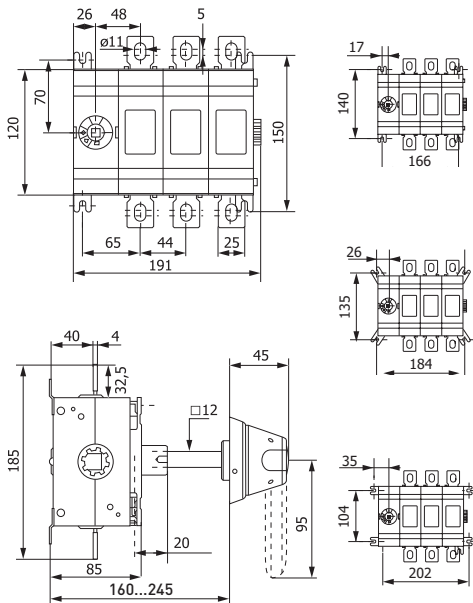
Overall and installation dimensions of 315-400 A 3P switch disconnectors
